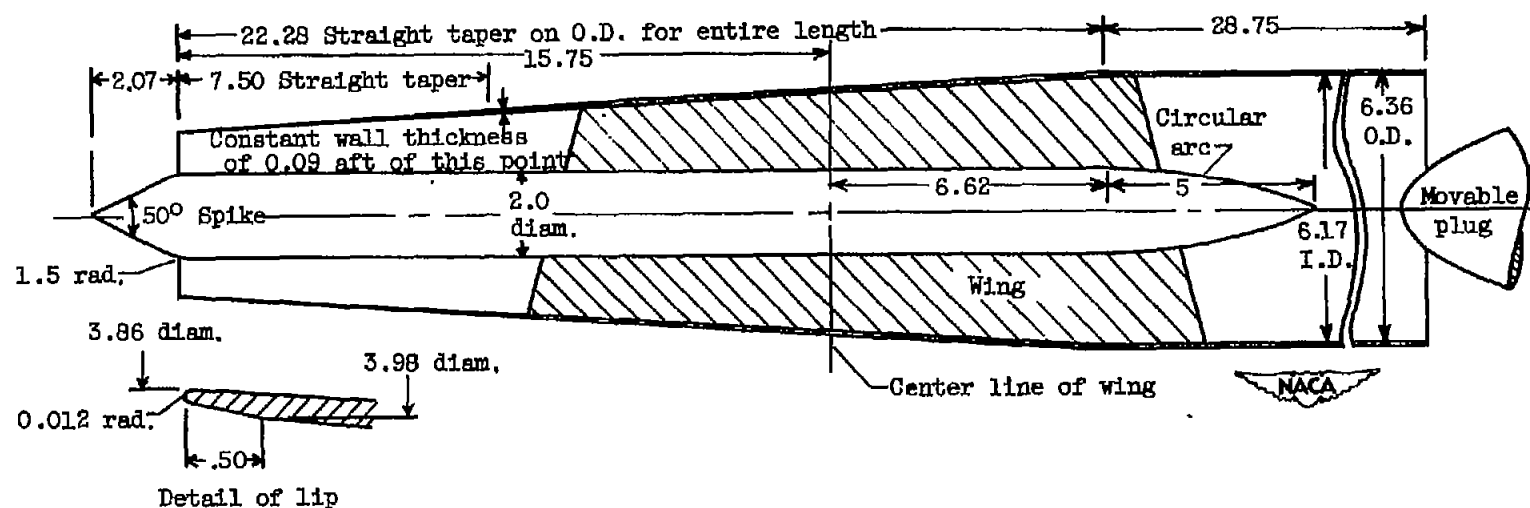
Sketch of engine 2. Dimensions are in inches.
